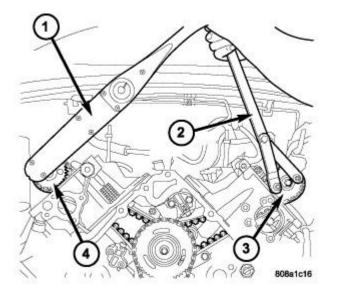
TIGHTENING RIGHT SIDE CAMSHAFT SPROCKET BOLT Courtesy of CHRYSLER LLC
